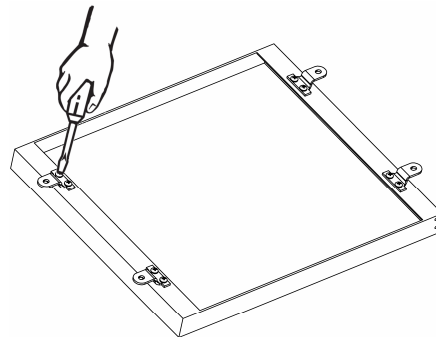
Solar Panel Mounting Bracket Assembly
